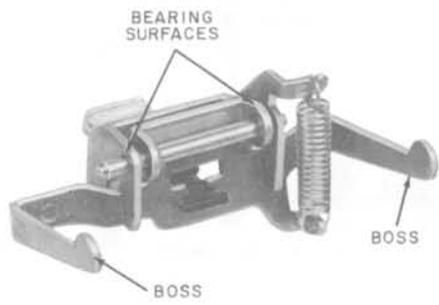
Operating Bracket Switch Assembly, 500- and 501-Type Telephone Sets
